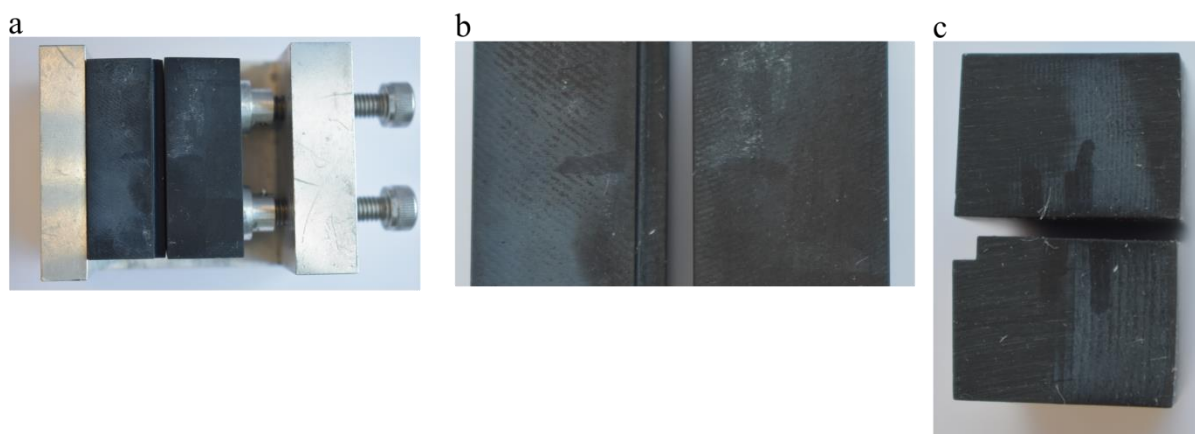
Acrylic mould [30 mm length \times 2.0 mm width \times 2.0 mm thickness]. (a) Parts of the mould and clamping block with cap screws (top view). (b) Close top view showing mould slot. (c) End view showing knife edges.
